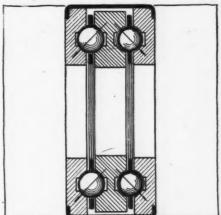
CROSS-SECTION OF SUSPENSION BEARING
